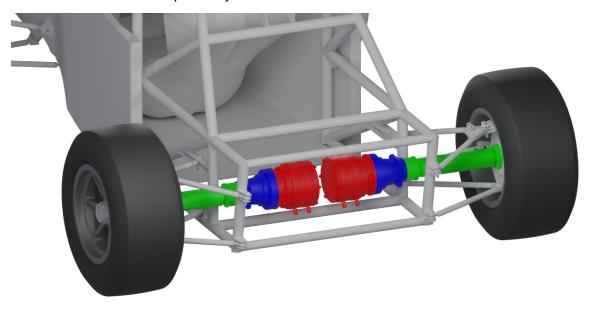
Illustration of formula student vehicle with in-board motor configuration, showing motors (red), gearboxes (blue) and drive shafts (green).
